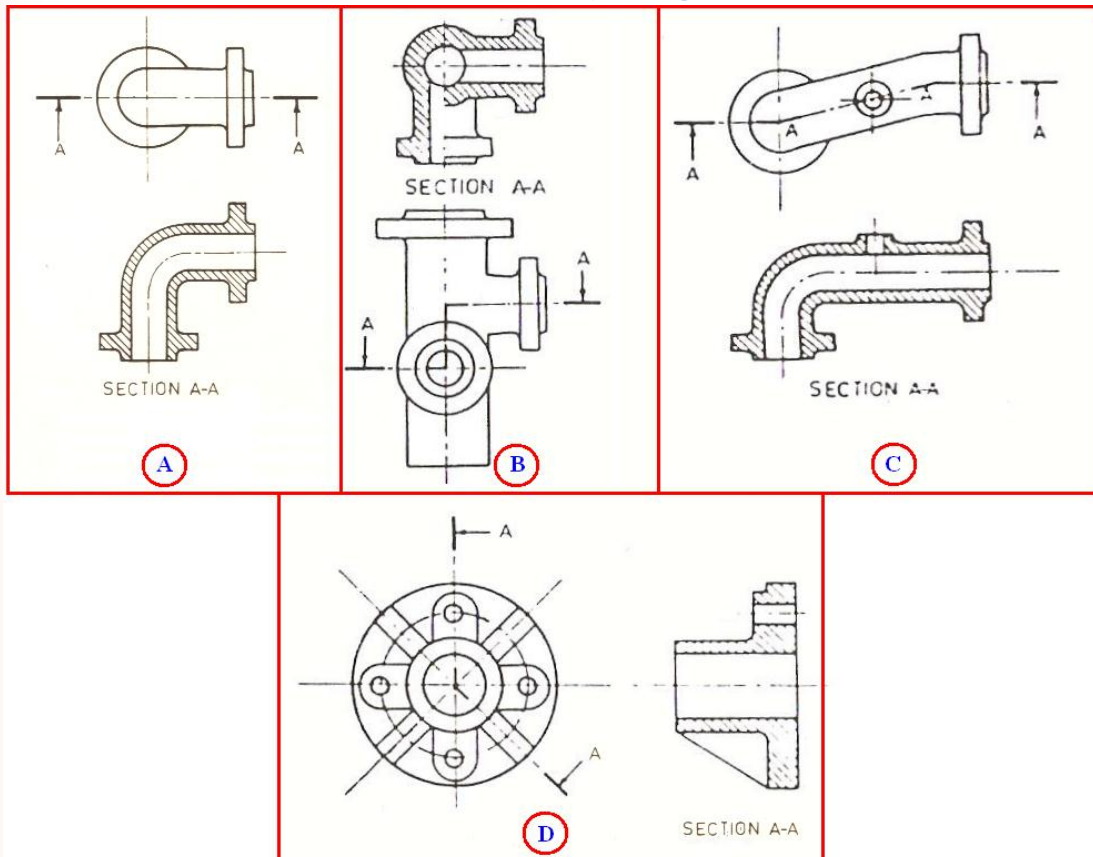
(a)Section in one plane. (b)Section in two parallel planes.(c) Section in three successive planes.(d) Section in two intersecting planes.
